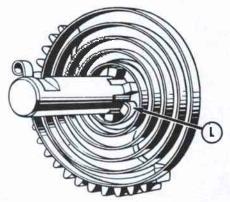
The kick starter return spring should be installed on spline shown.
